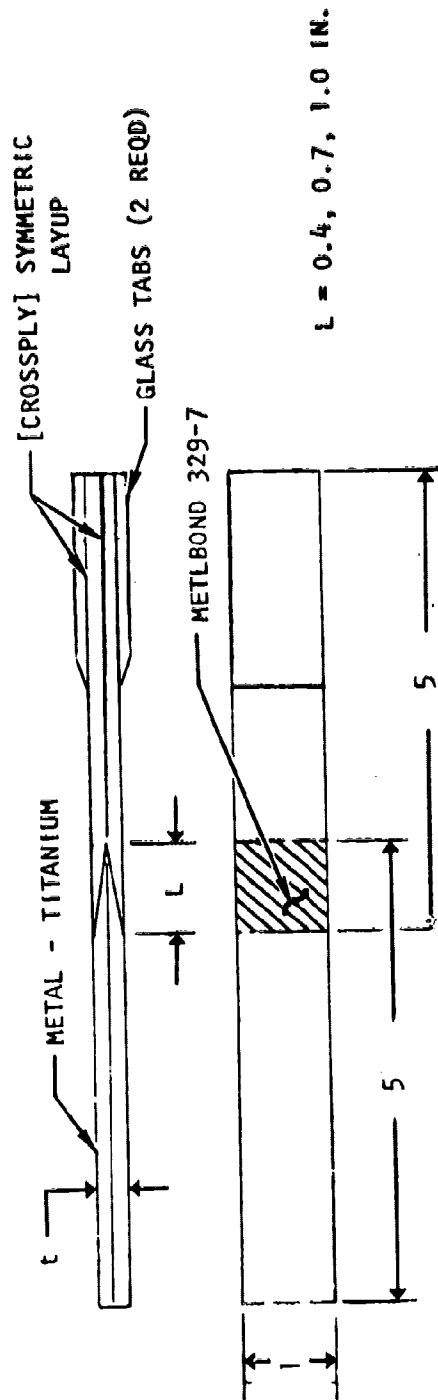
Compression Adhesive-Bonded Lap Joint Test Specimen - Graphite/Epoxy Adherends (Type AS/3002 Batch), Adhesive Metlbond 329-7
